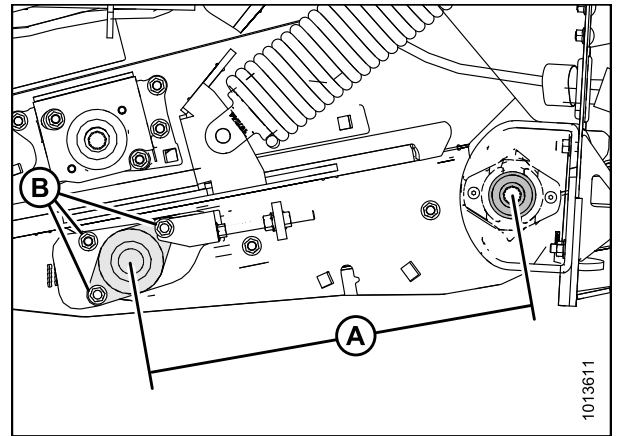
Left Side Rear Deck Shown—Right Side Opposite
